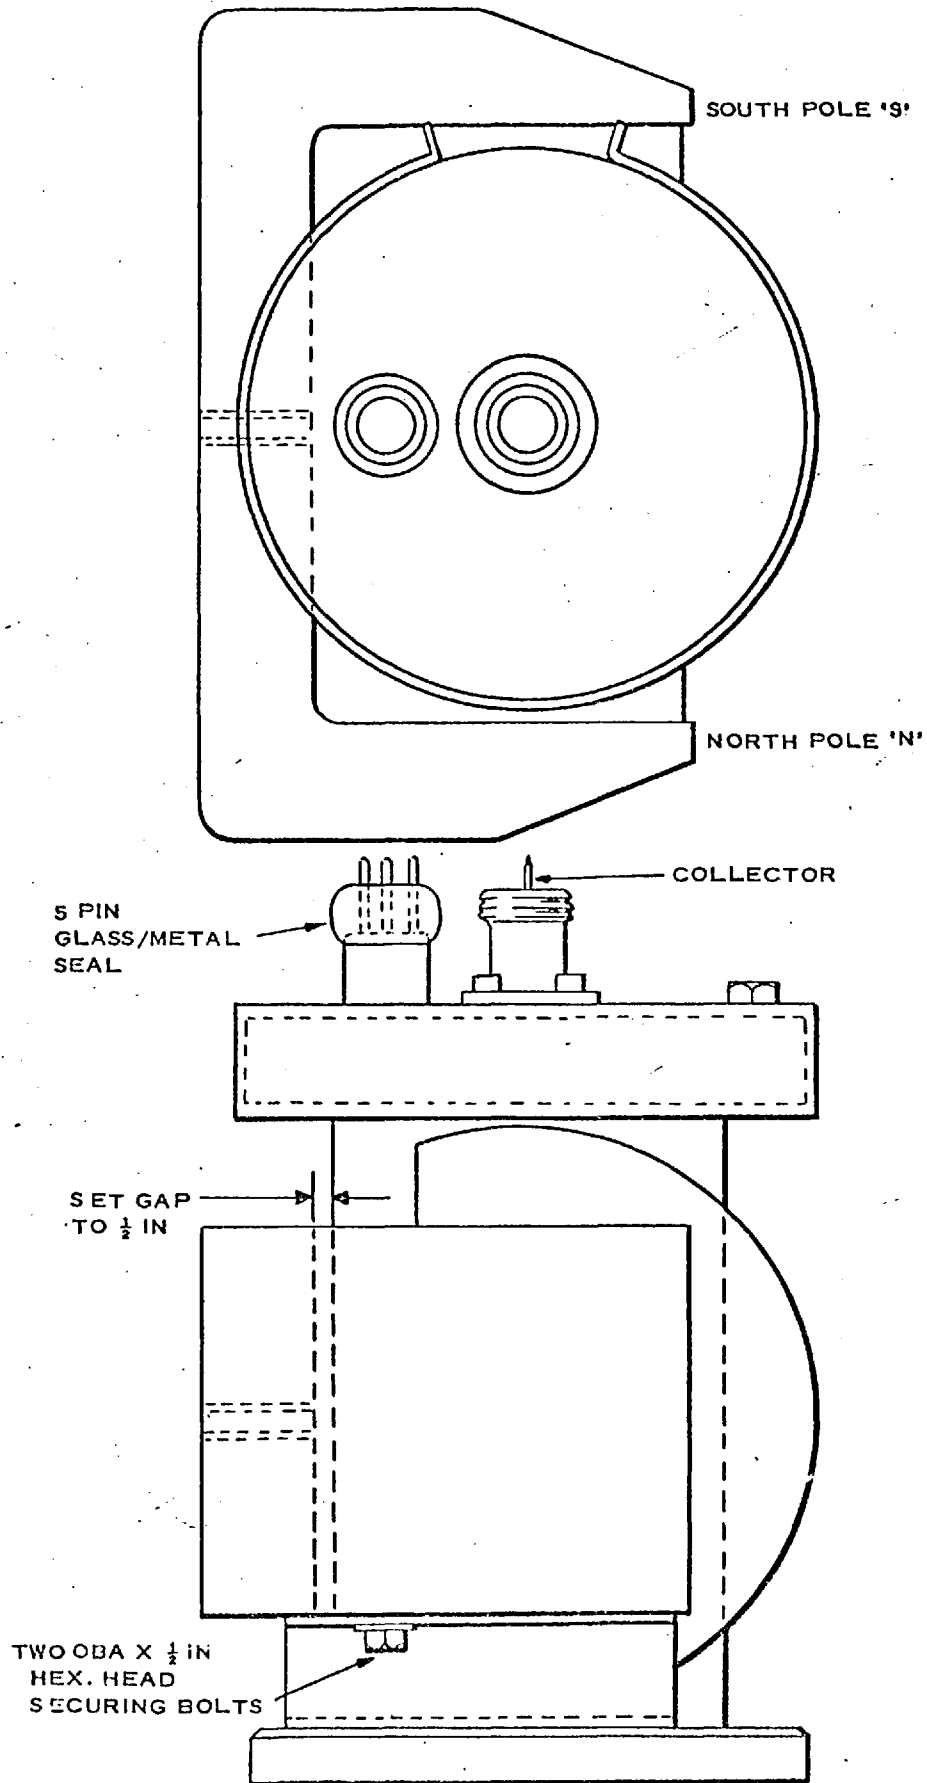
ASSEMBLY OF MAGNET TO MS10 TUBE UNIT
